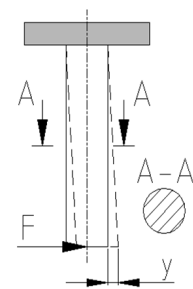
Tool bending y [mm] and load by solitary force F [N]
